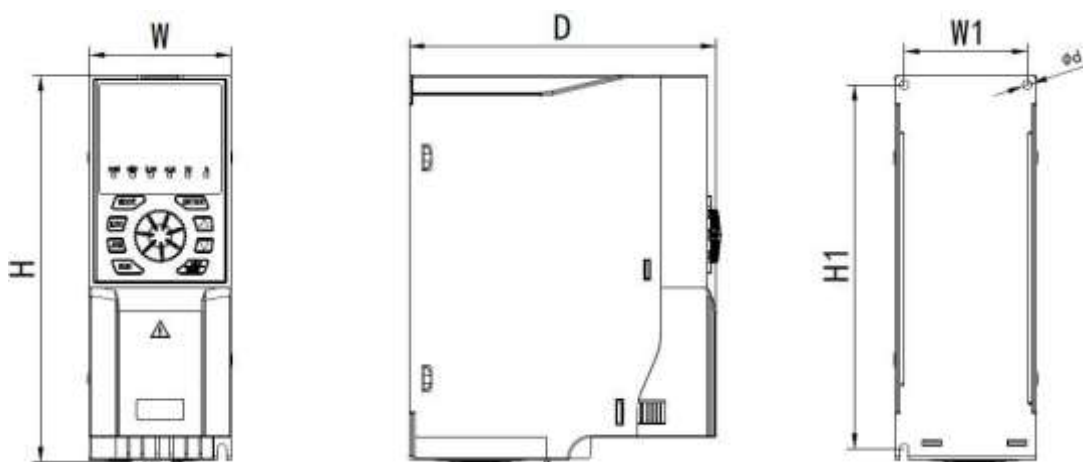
External and mounting dimensions(three-phase 15kW and
